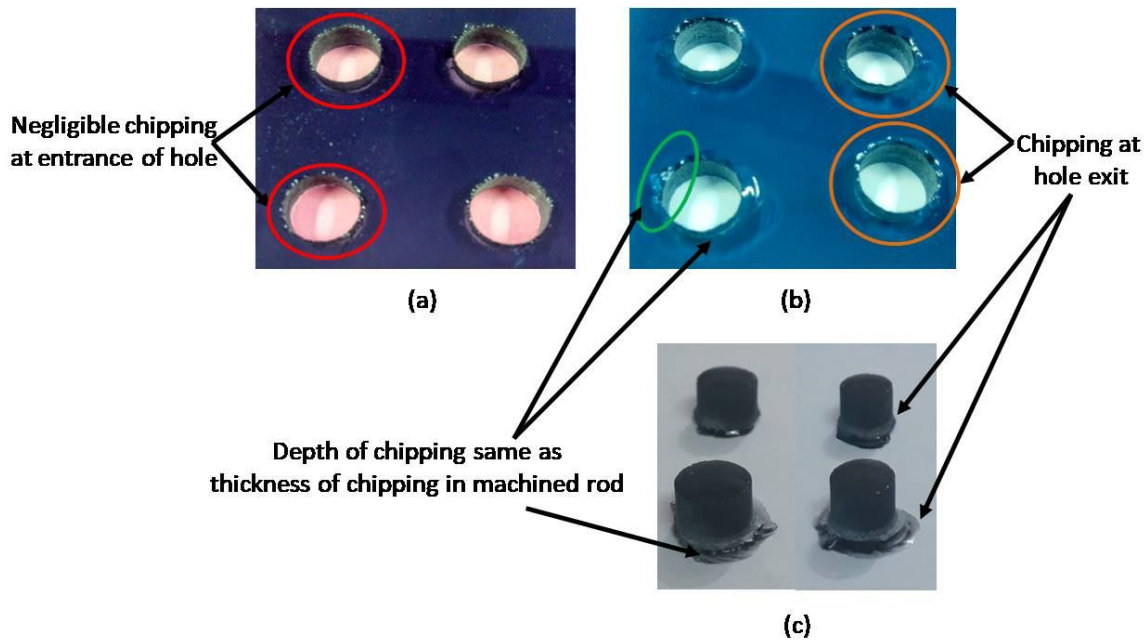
Illustration of the specimen samples included (a) Front side (b) Back side and (c) Machined rod
